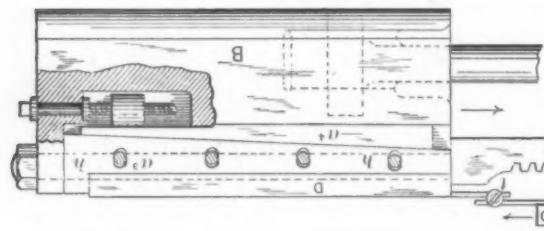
Plan and Section Showing Mounting of Cross Head.
